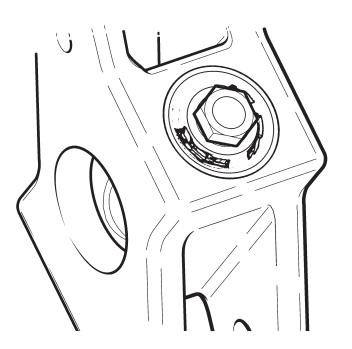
ELASTOMERIC BEARING DAMAGE
